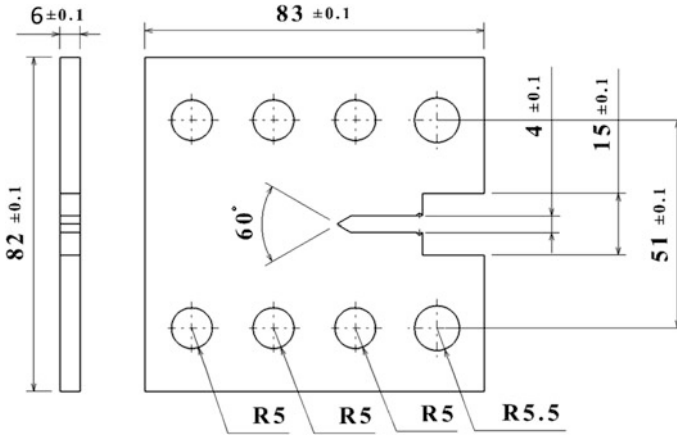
Geometry and design dimensions of modified CT (MCT) specimen
